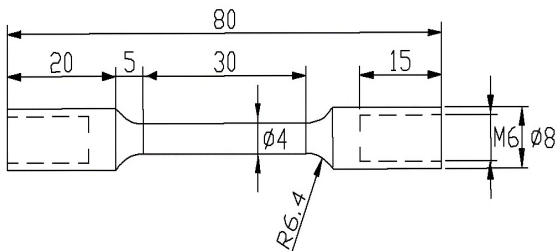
Configuration of smooth specimen for corrosion fatigue test.
